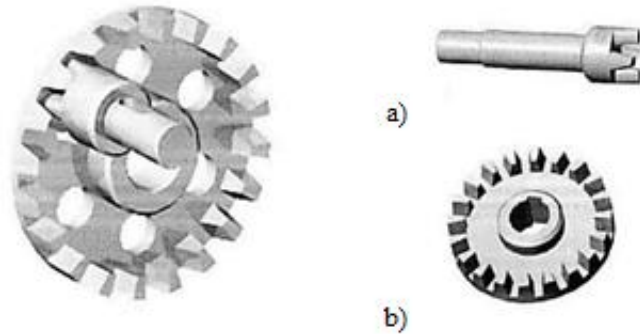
Gear transmission with internal gearing of the front teeth and parallel axes of rotation of the wheels [25]
